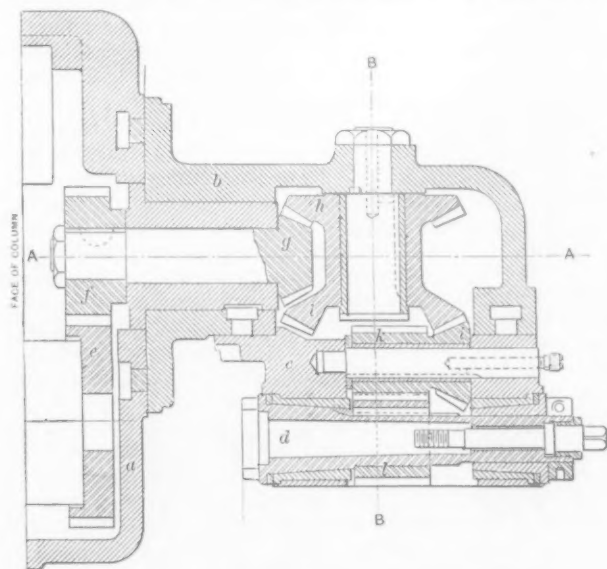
Sectional View of the Milwaukee Universal Milling Attachment.
